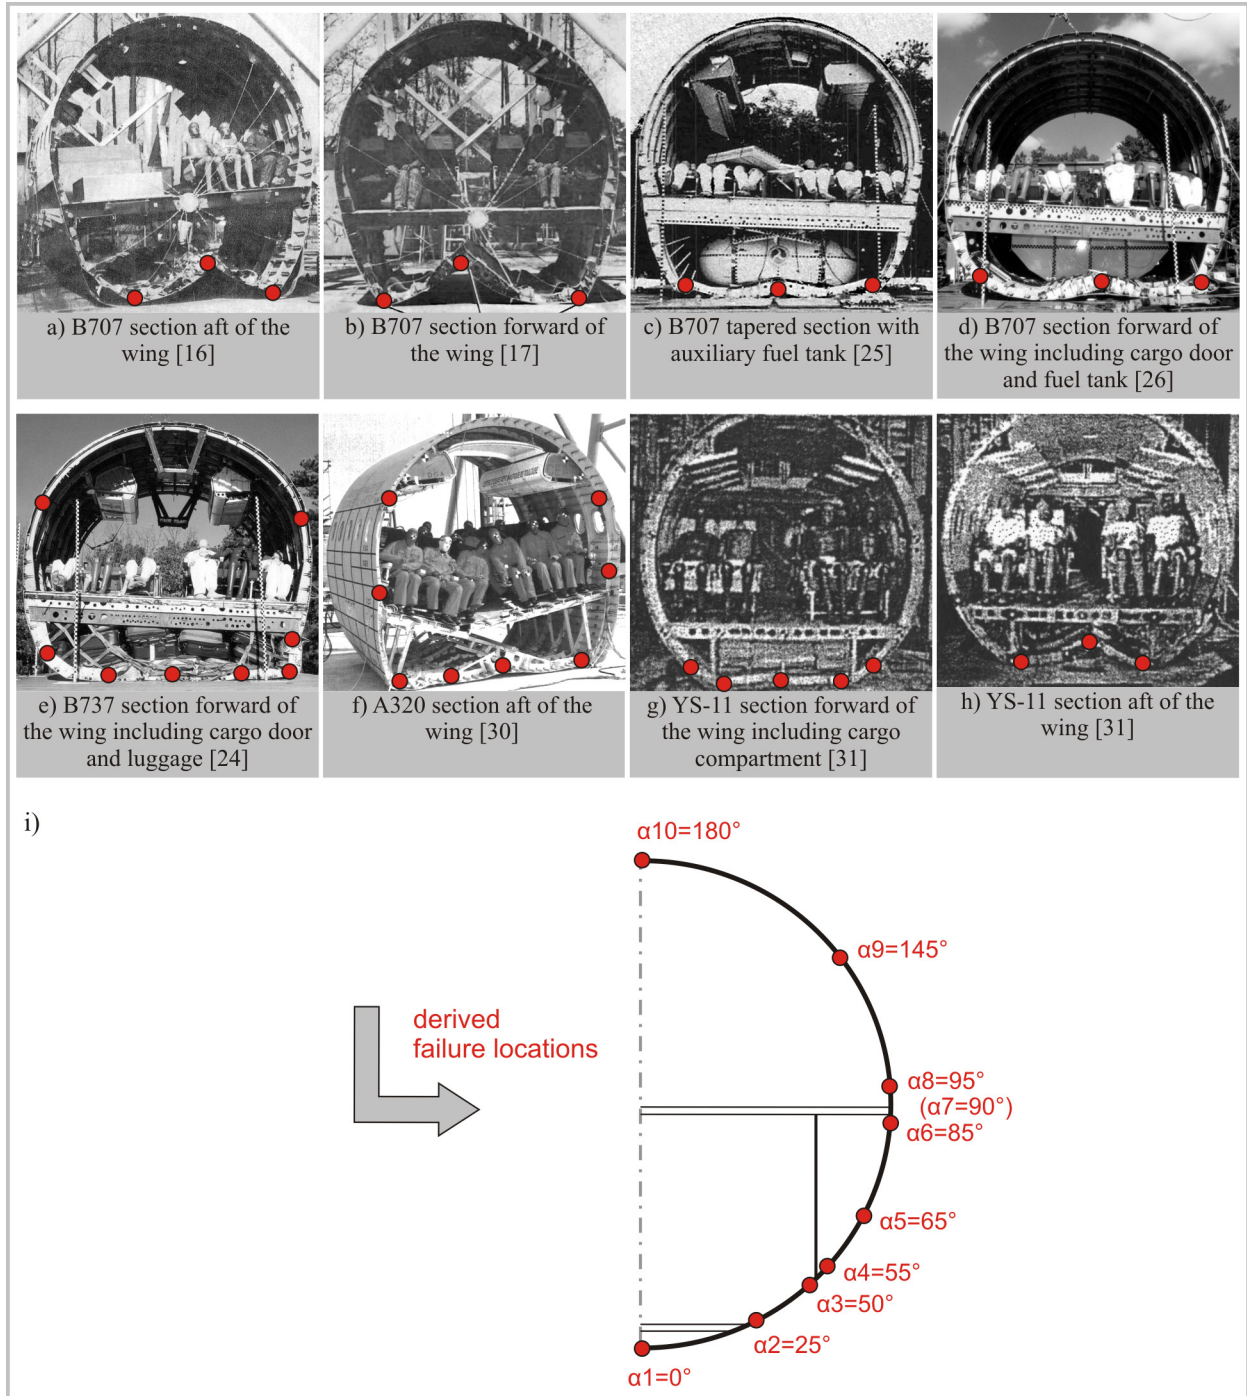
Frame failure locations of typical fuselage section drop tests
